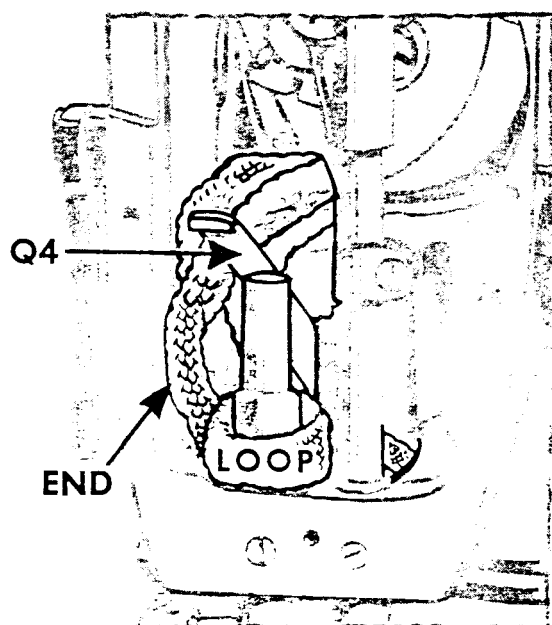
Location of Wick Loop and Wick End in Machine Head
